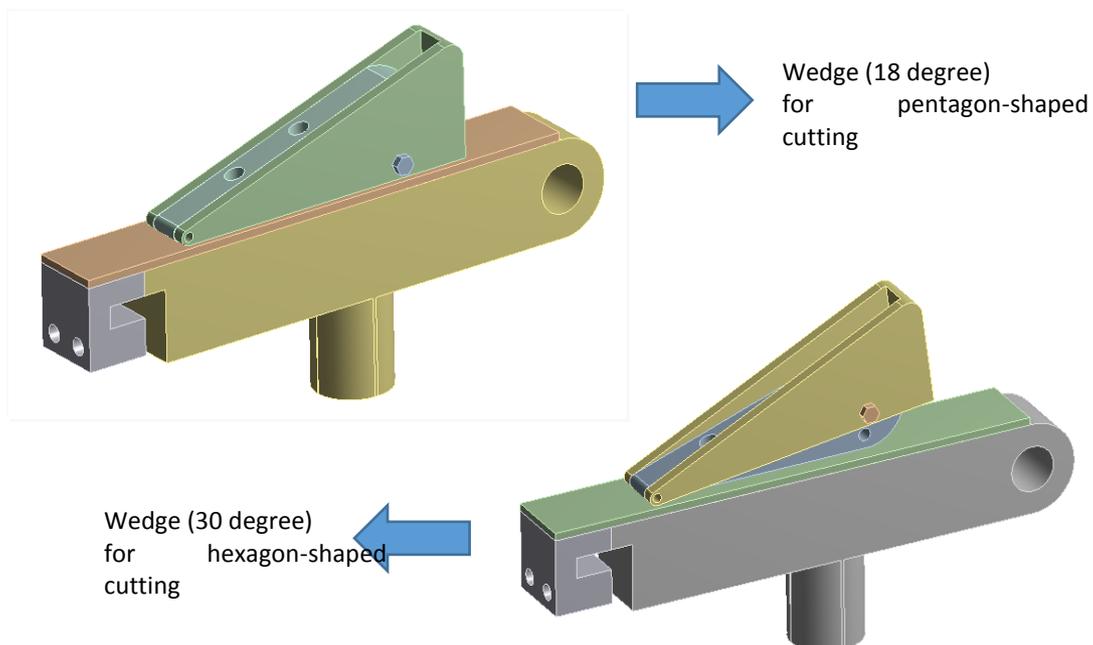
Adjustable wedge for pentagon- and hexagon-pentagon cutting
